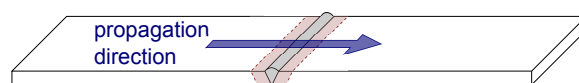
schematic of the idea of a cross-weld measurement
